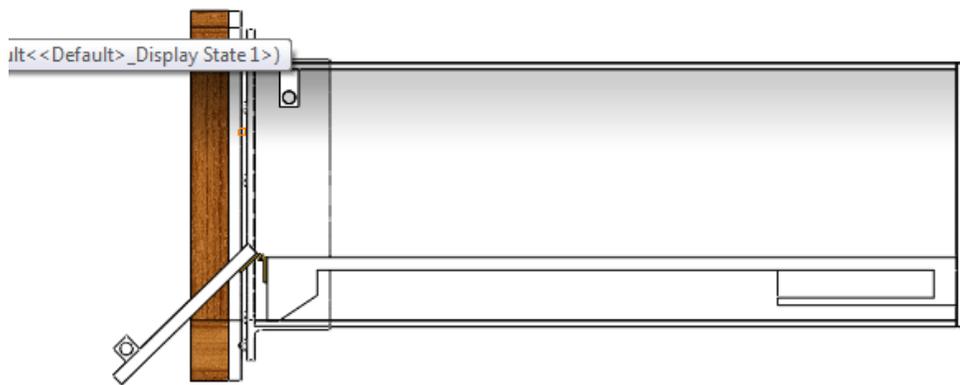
Full Sectioned Side View of the Payload Showing the Designed Opening of the Door
